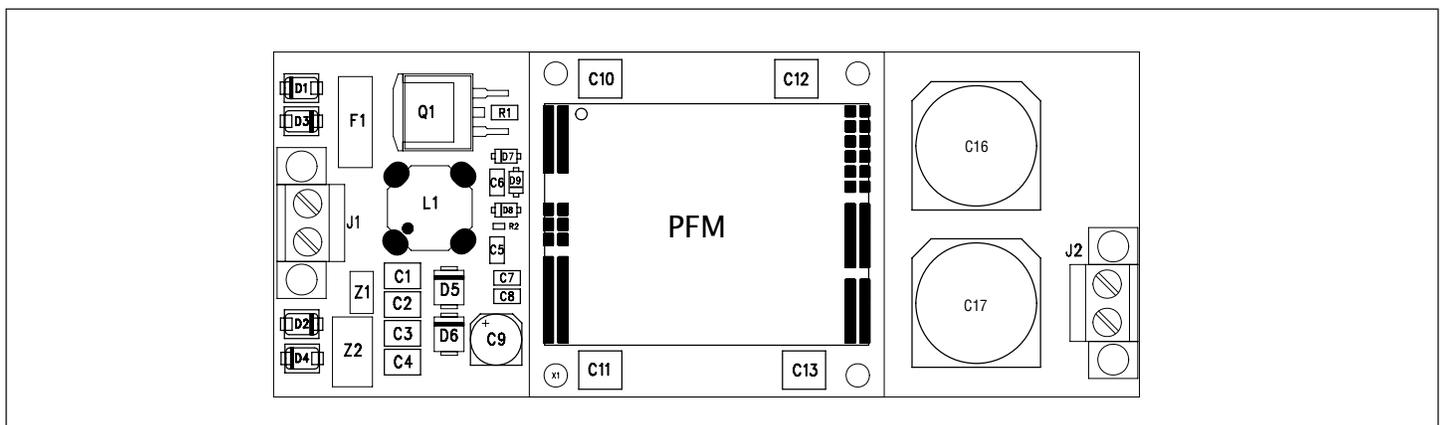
The PFM evaluation board shown (actual size) above illustrates the layout and compact size of a complete AC to 48 Vdc, 200 Watt front end power supply using the PFM.
